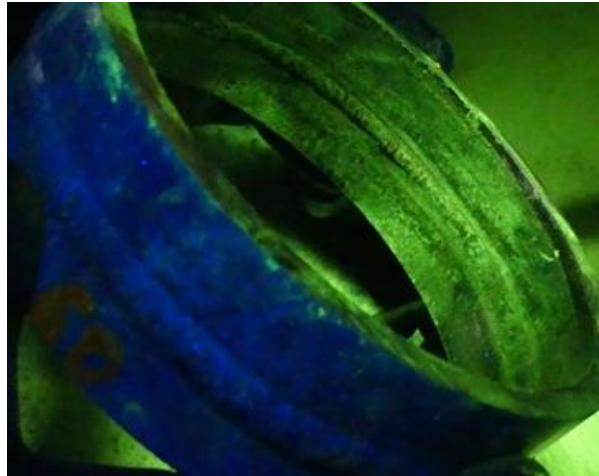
Magnetic particle testing of X42-X52 welded joint
